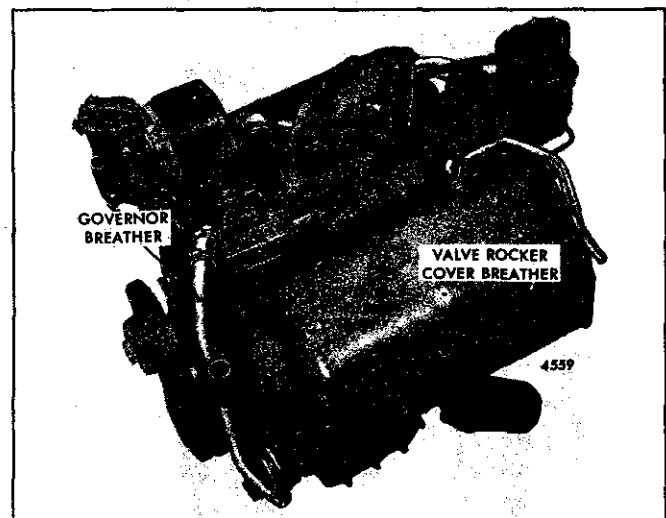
Typical Breather Mountings (8V-53 Engine)
